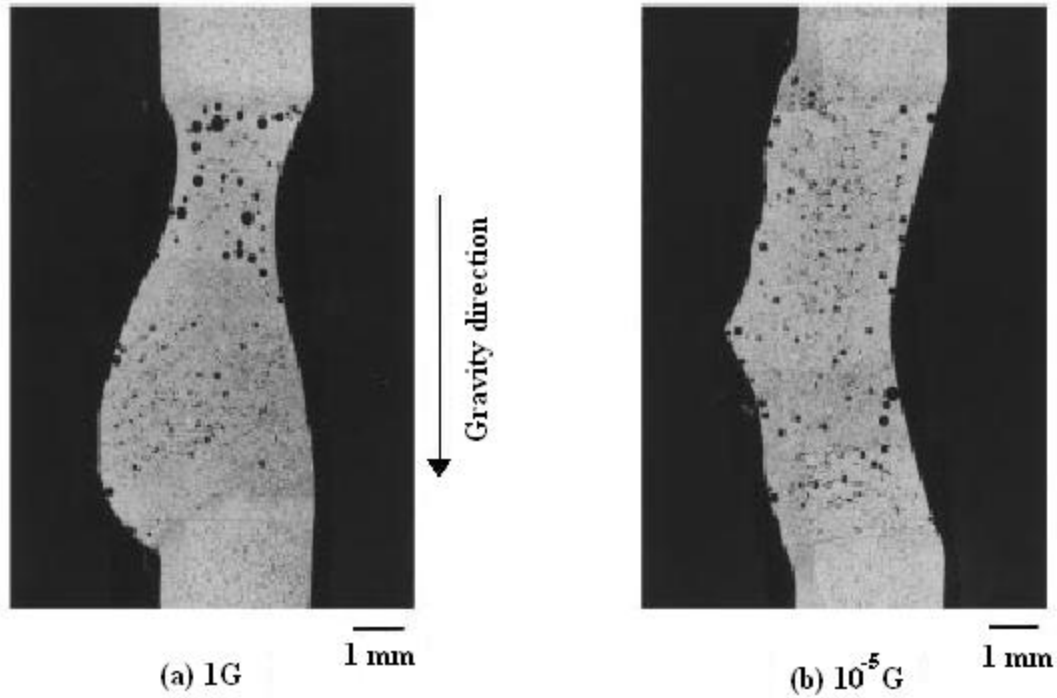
Transverse sections of bead-on-plate welds welding [37]
